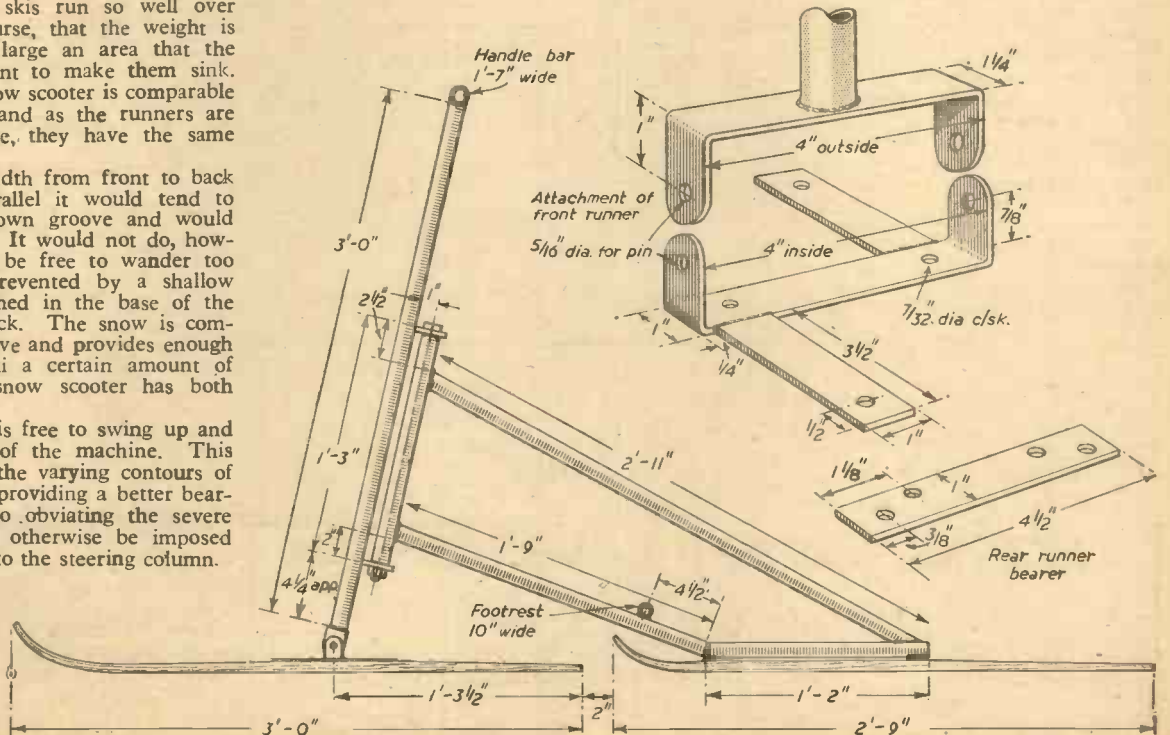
A dimensioned side elevation of the first design and details for attaching the runners.
